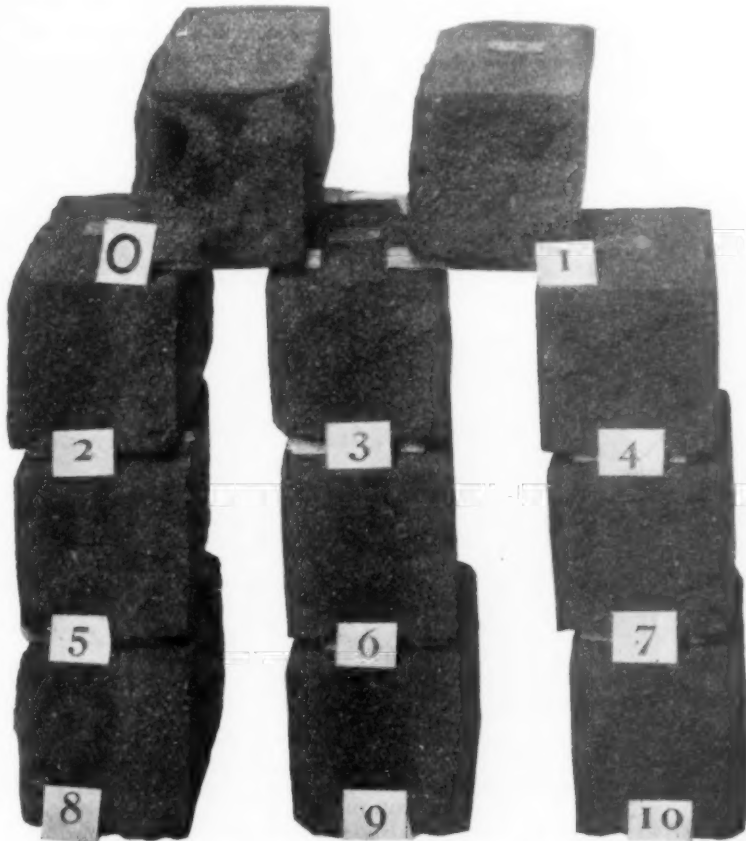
FRACTURED SURFACES OF GREEN SAND TEST BARS
